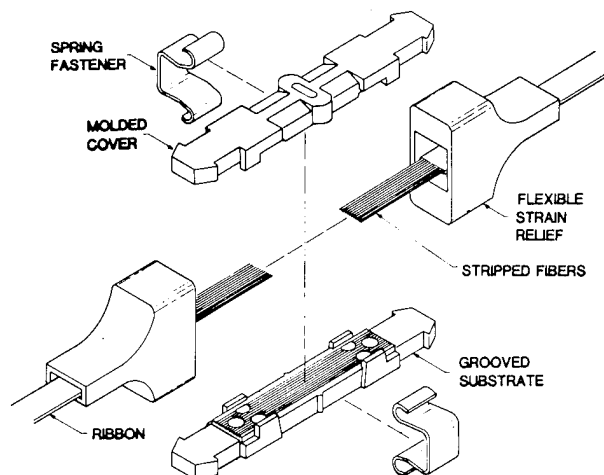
EXPLODED RAPID RIBBON SPLICE
